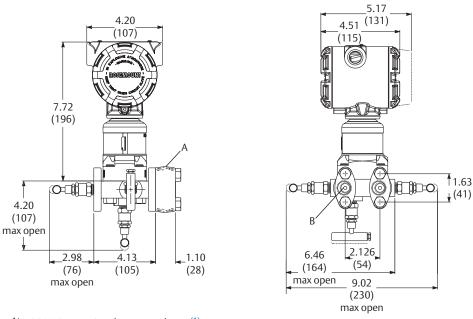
Rosemount 305 Three Valve Traditional DIN Style Manifold
